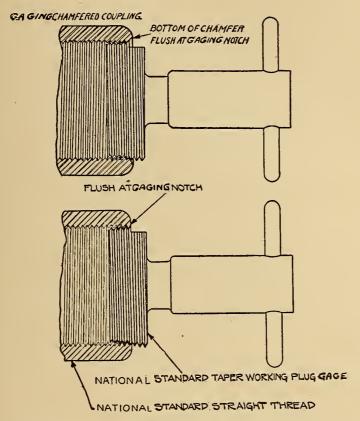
Illustration of straight threaded coupling gaged with standard taper working plug gage
